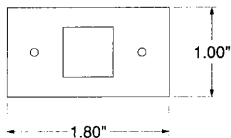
Scale drawing of the mask used to pattern the oxide barrier.
